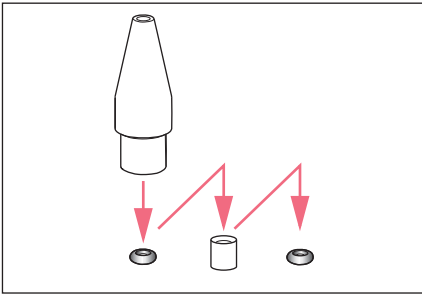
Cross-section of the grip head with correctly inserted o-rings and distancing sleeve
